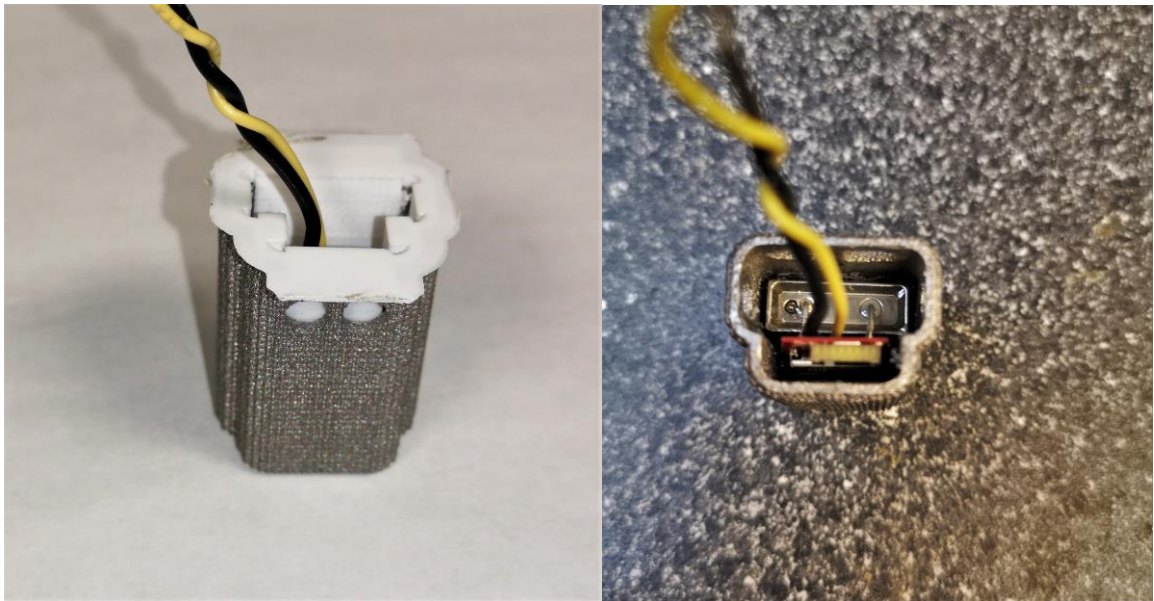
Custom fixture is installed, suspending instrumentation package for the first silicone stage.
